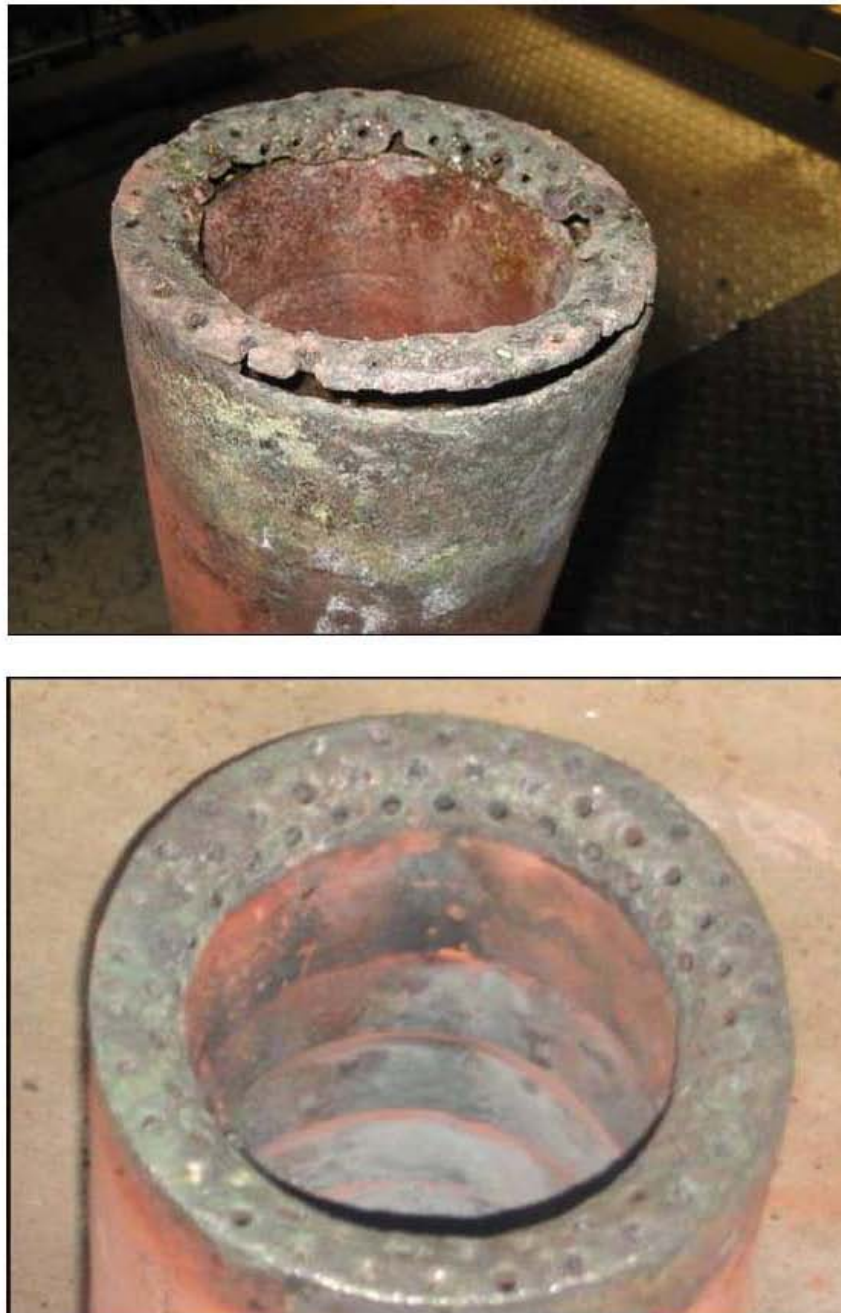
Close-up view of inlet and louvers of the film cooler after HLW Turnover Test following the MACT tests [41].
